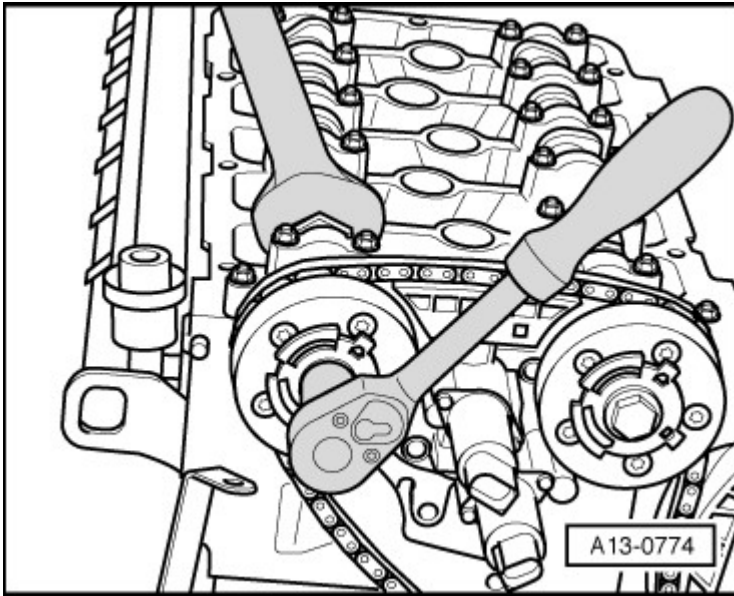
Identifying Tools To Loosen Intake Camshaft Adjuster Bolt
